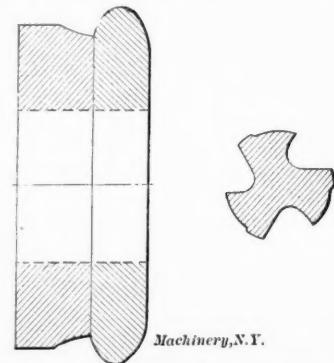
Fluting Cutter and Section of 15-16-inch Reamer-drill
